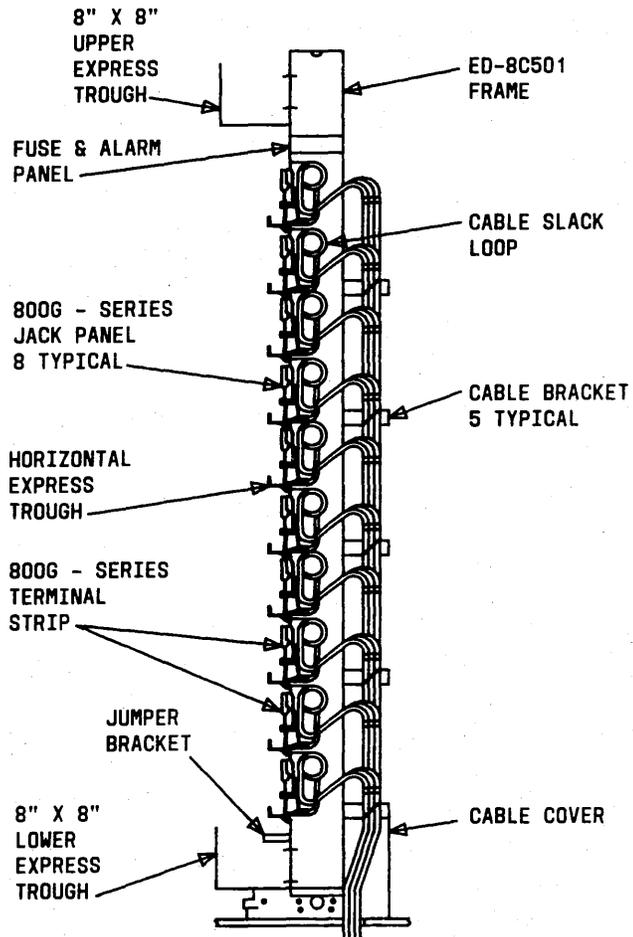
Side View of Bay Showing Cabling Slack Loops
